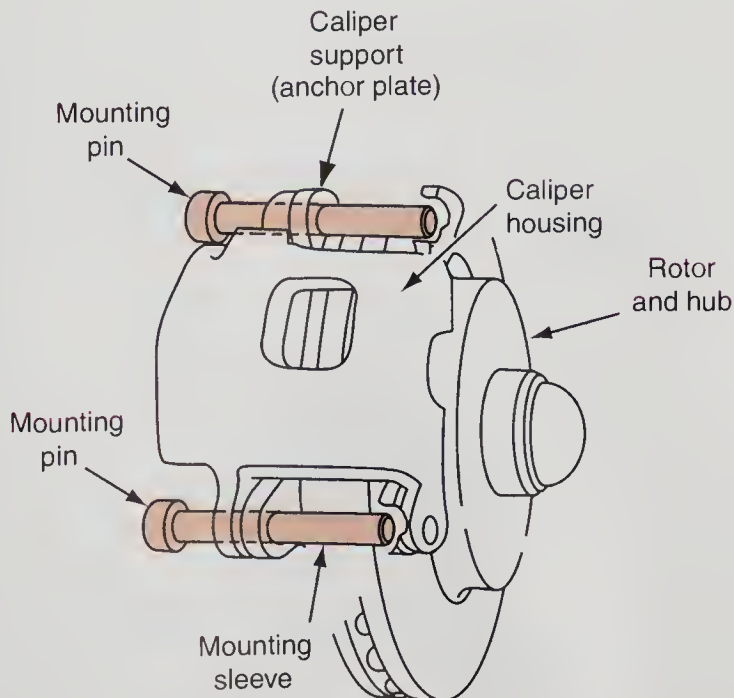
A floating caliper rides on two bolts or guide pins in the caliper support.
